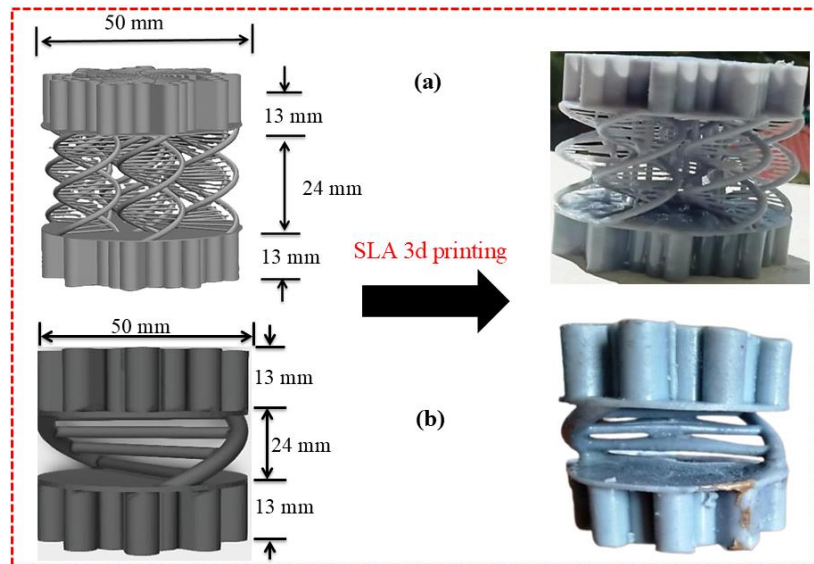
Dimension of the Hybrid designs a) Designs of hex and Single Hybrid lattice and b) Printed Part of hex and single hybrid lattice structure.
